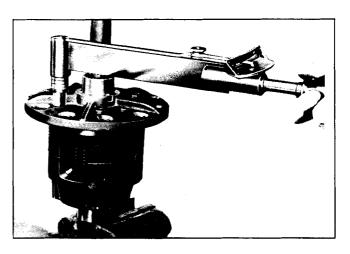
B-17 Torquing Case Half Bolts - Two or Four Pinion
